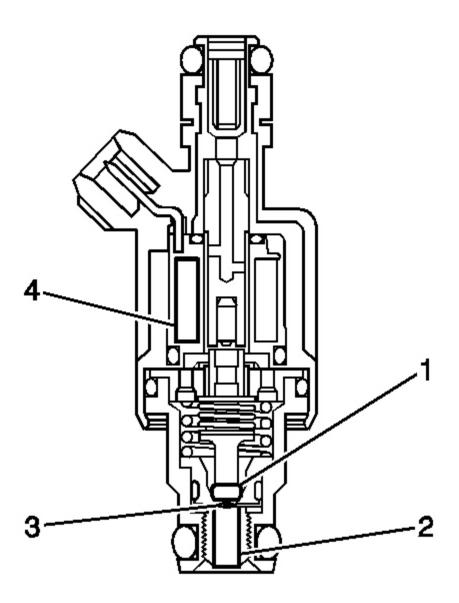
Fuel Injector Assembly Cross Sectional View Courtesy of GENERAL MOTORS CORP.
